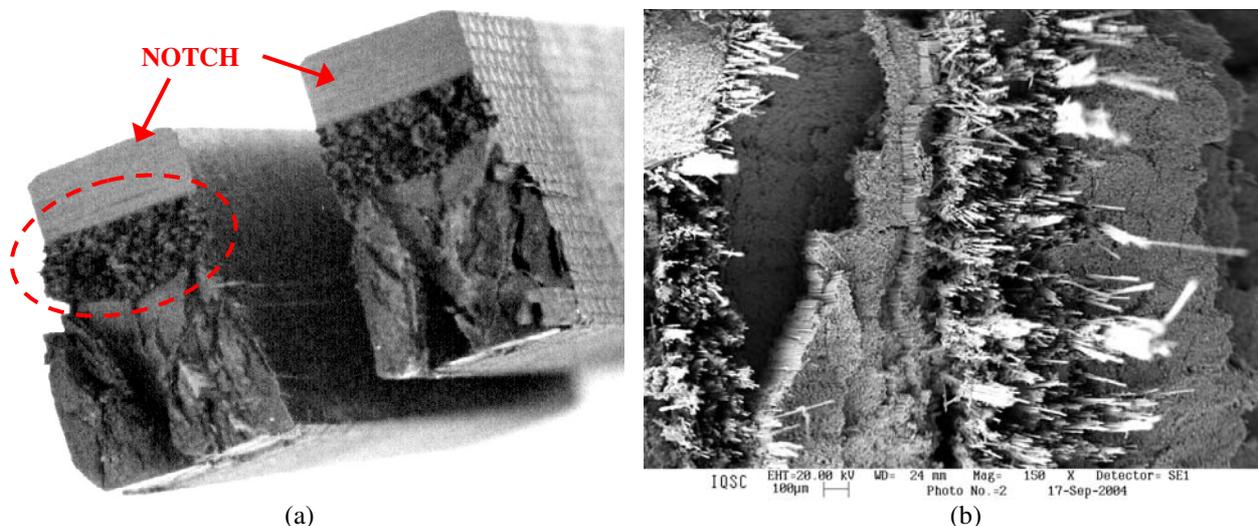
Fracture surfaces of TP180 laminate tested at 100°C: (a) General view; (b) Localized view by using scanning electronic microscopy techniques.
